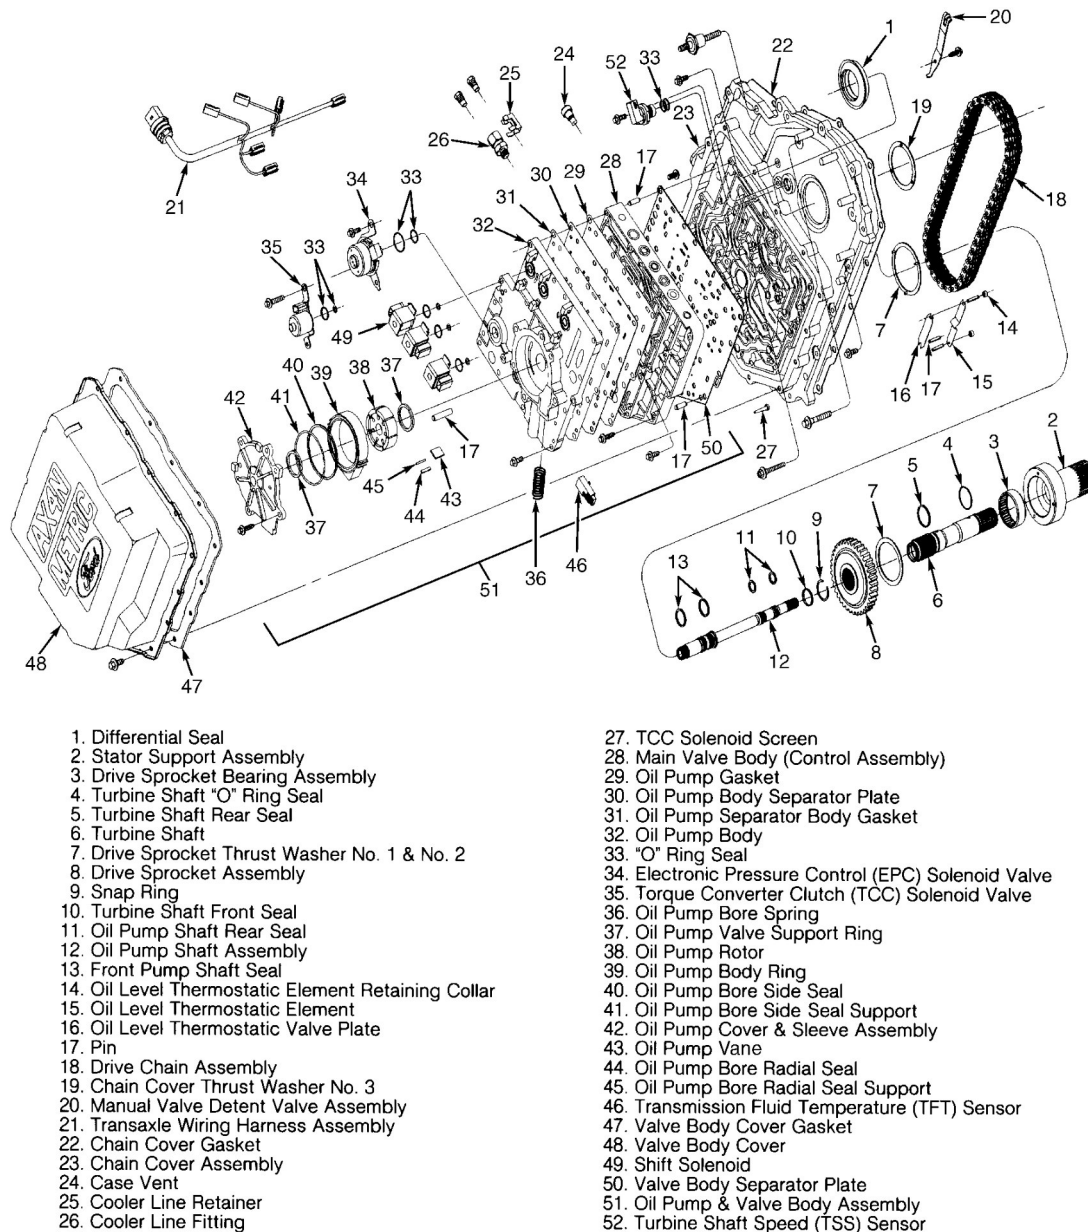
Exploded View Of AX4N Transaxle Case Assembly
